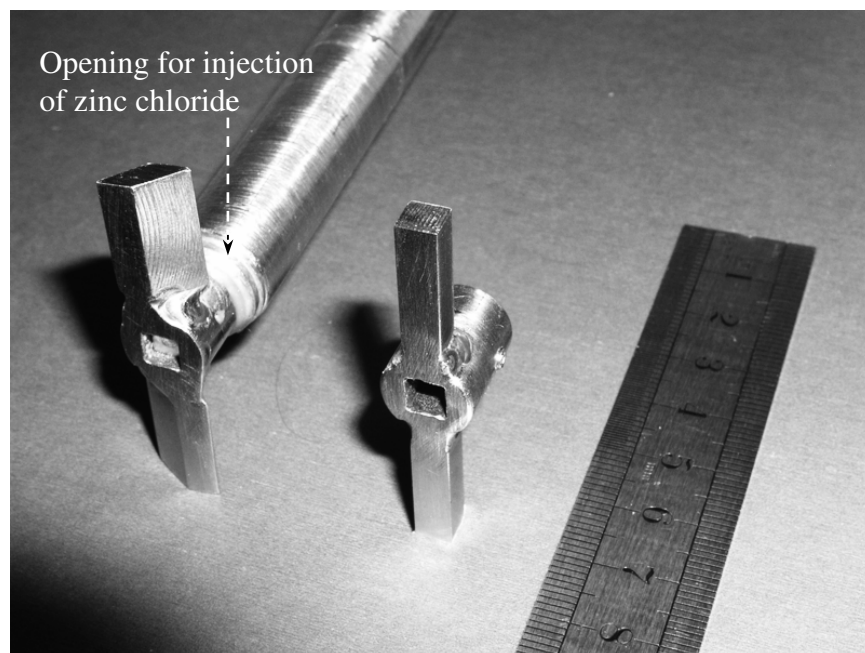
Left- 45° blade for DM installer A, right- 90° blade for DM installer A.
